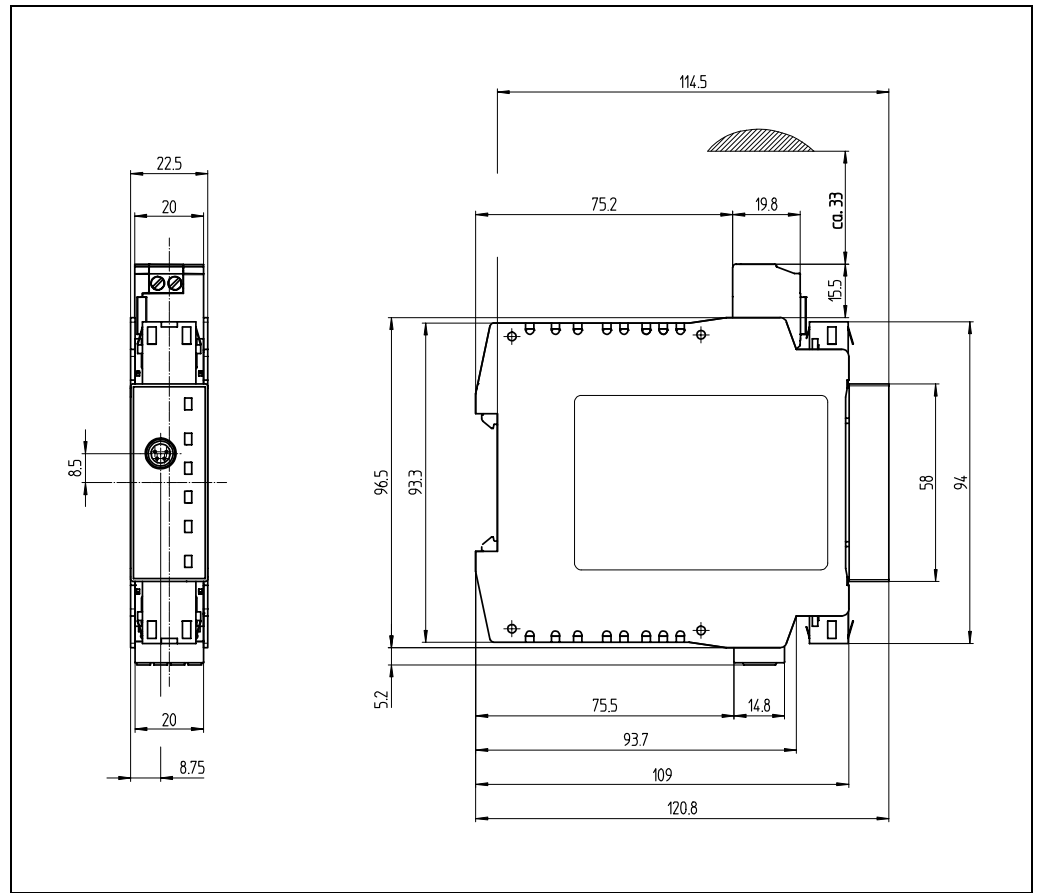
Dimensional drawing UE4140/UE1140/UE1940 EFI gateway (mm)
